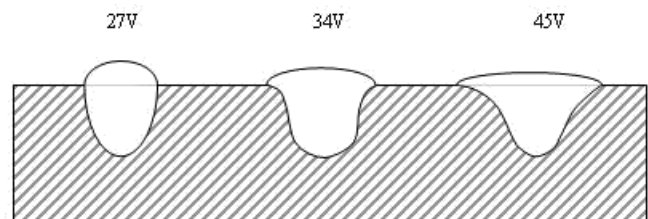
The weld bead shapes at different voltage levels process [2]
